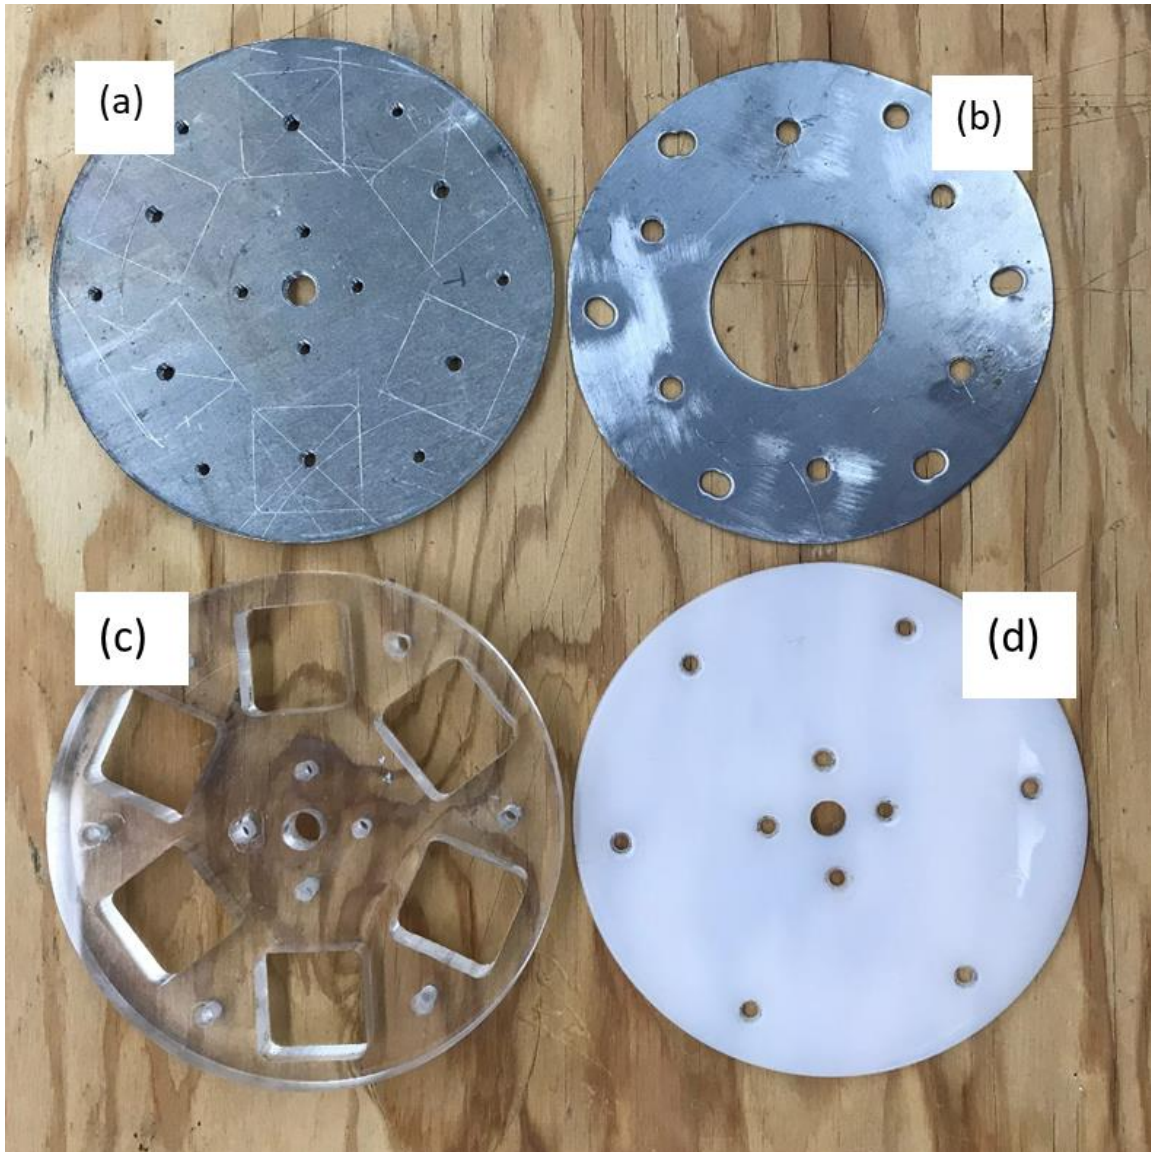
Picture of mechanical components for the housing unit. The components are a) aluminum housing back, b) sheet metal, c) acrylic magnet holder, d) front piece.
